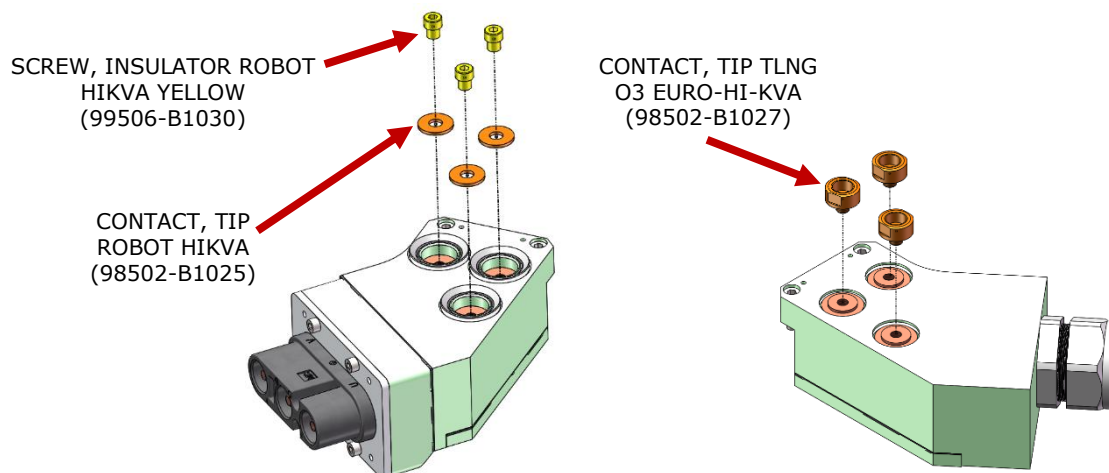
Contact Tip Robot and Tool HIKVA Module
